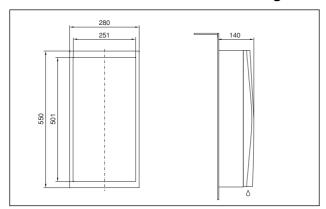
SK 3302.xxx external mounting (except SK 3302.3xx)
